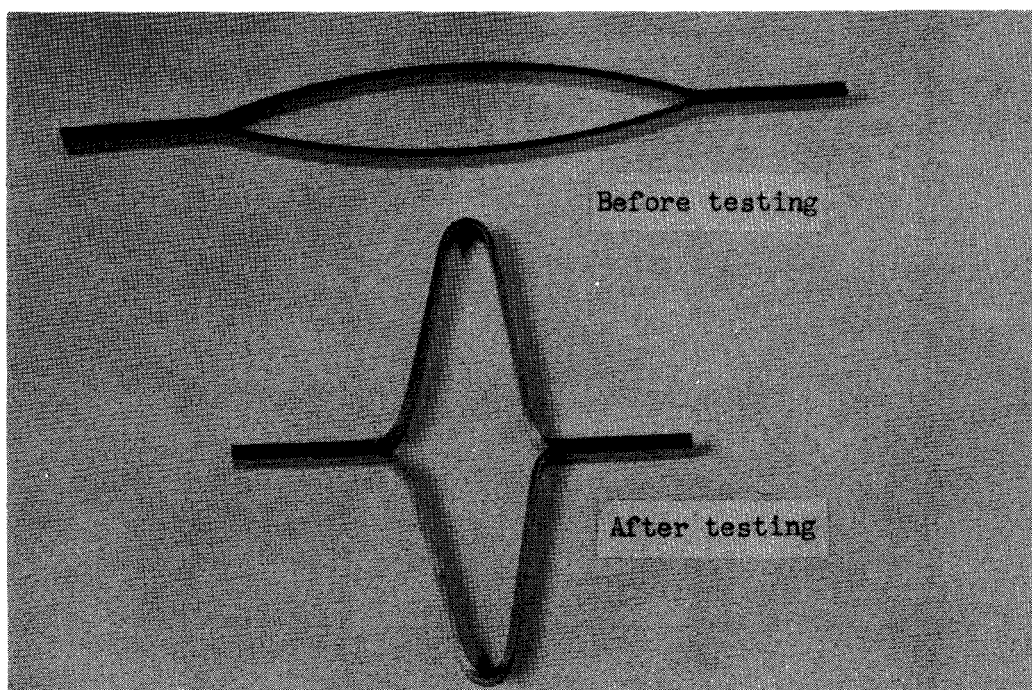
Fracture of coated specimen after a small amount of shortening. L-63-4834.1
